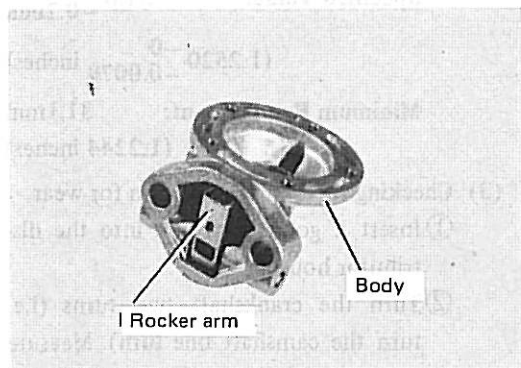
Checking Rocker Arm for Damage or Wear
